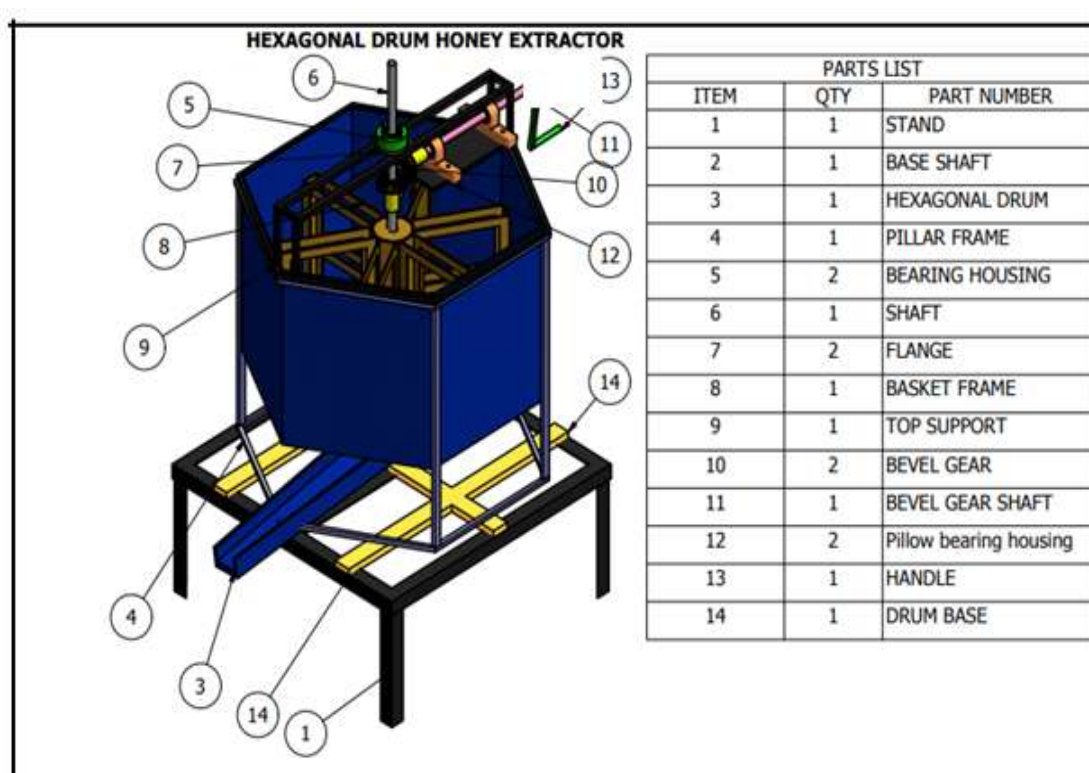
Assemble view of Hexagonal Drum Honey Extractor
